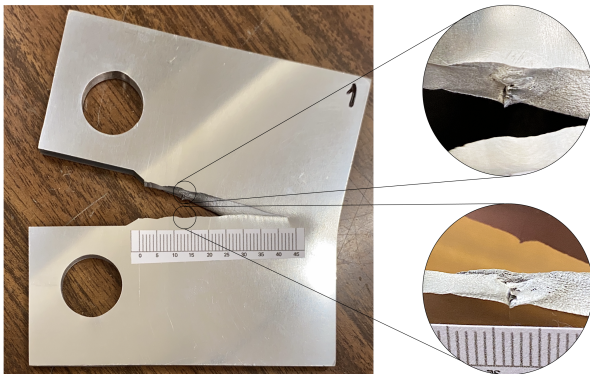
CT specimen with apparent defects in the welded joint
